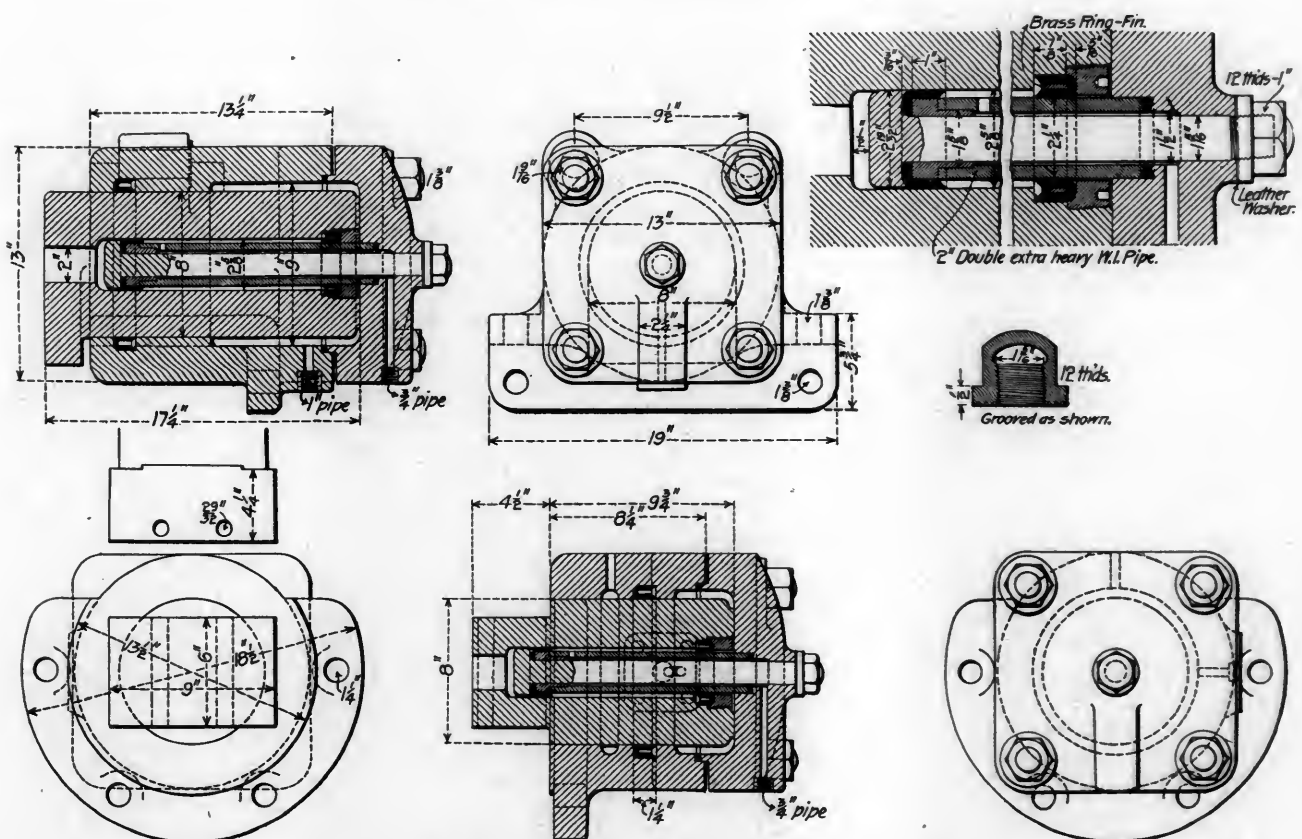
Sections of Cylinders and Pull Backs, Hydraulic Forging Machine.—Juniata Shops, Pennsylvania Railroad.
